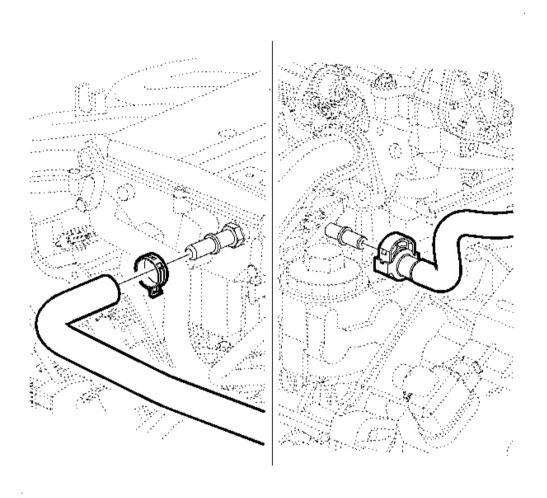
View Of Vacuum Brake Booster Check Valve & Hose Courtesy of GENERAL MOTORS CORP.
